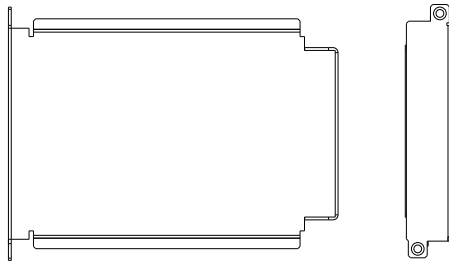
RUGGEDCOM RX1500PN LM Blank
